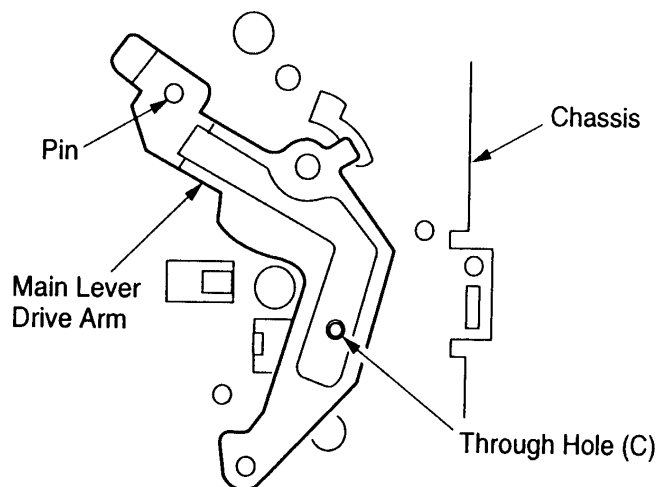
P5 Arm Unit/Main Lever Drive Arm Removal
